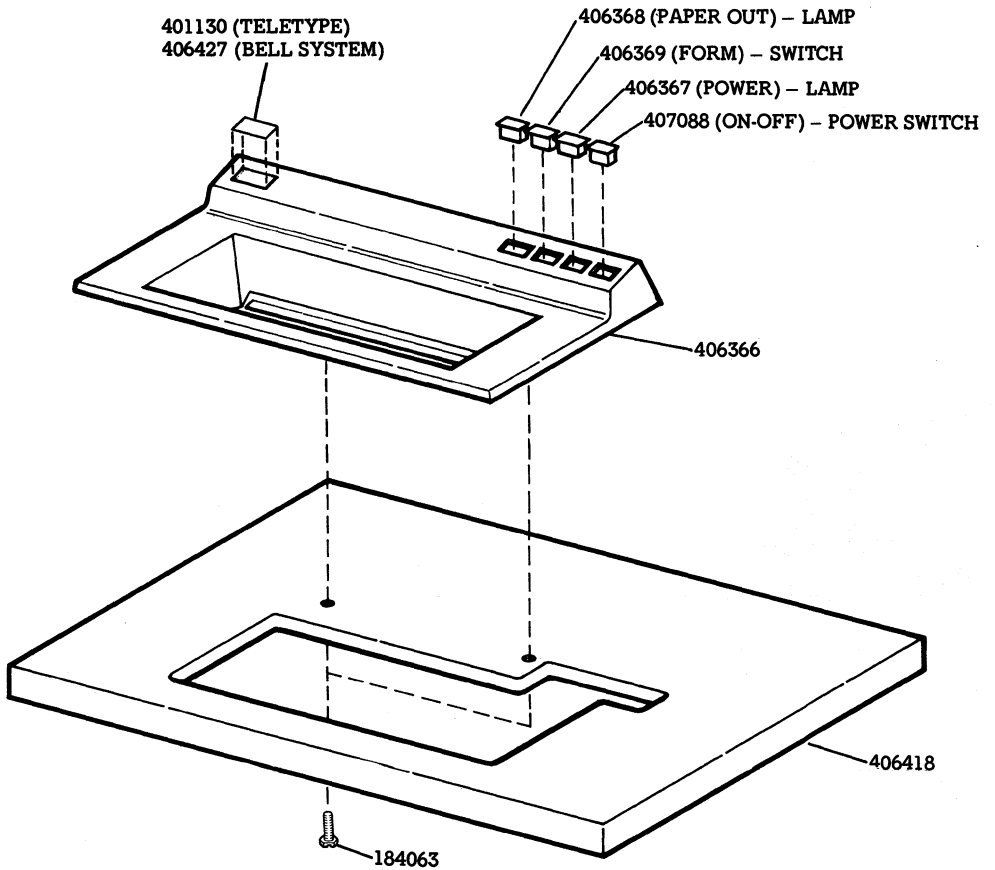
CAB302/ZZ Printer Cabinet Core for Forms Access Printer Cabinet (Cont)
